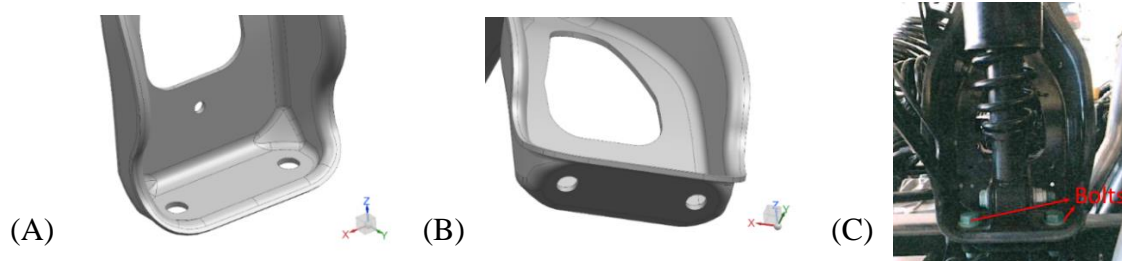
The flat surface of the bracket that sits on the chassis (A & B) and bracket is connected to the below connection elements with two M18 bolts (C).
